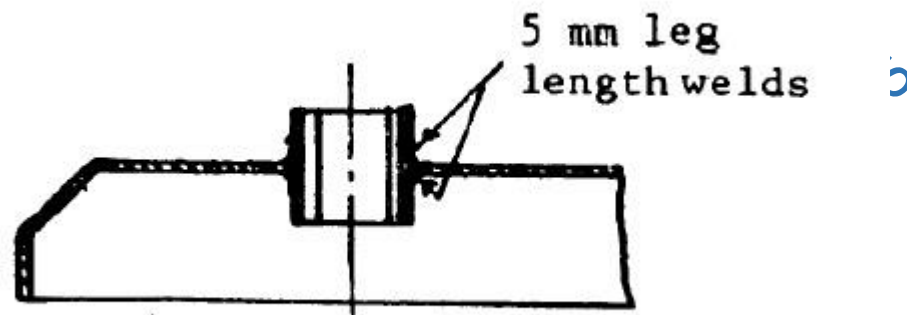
Tapped socket and boss welded into tank plate
